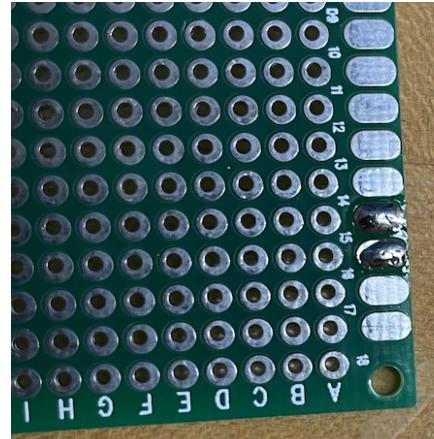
Forming solder blobs on the pads to solder wires onto them next
